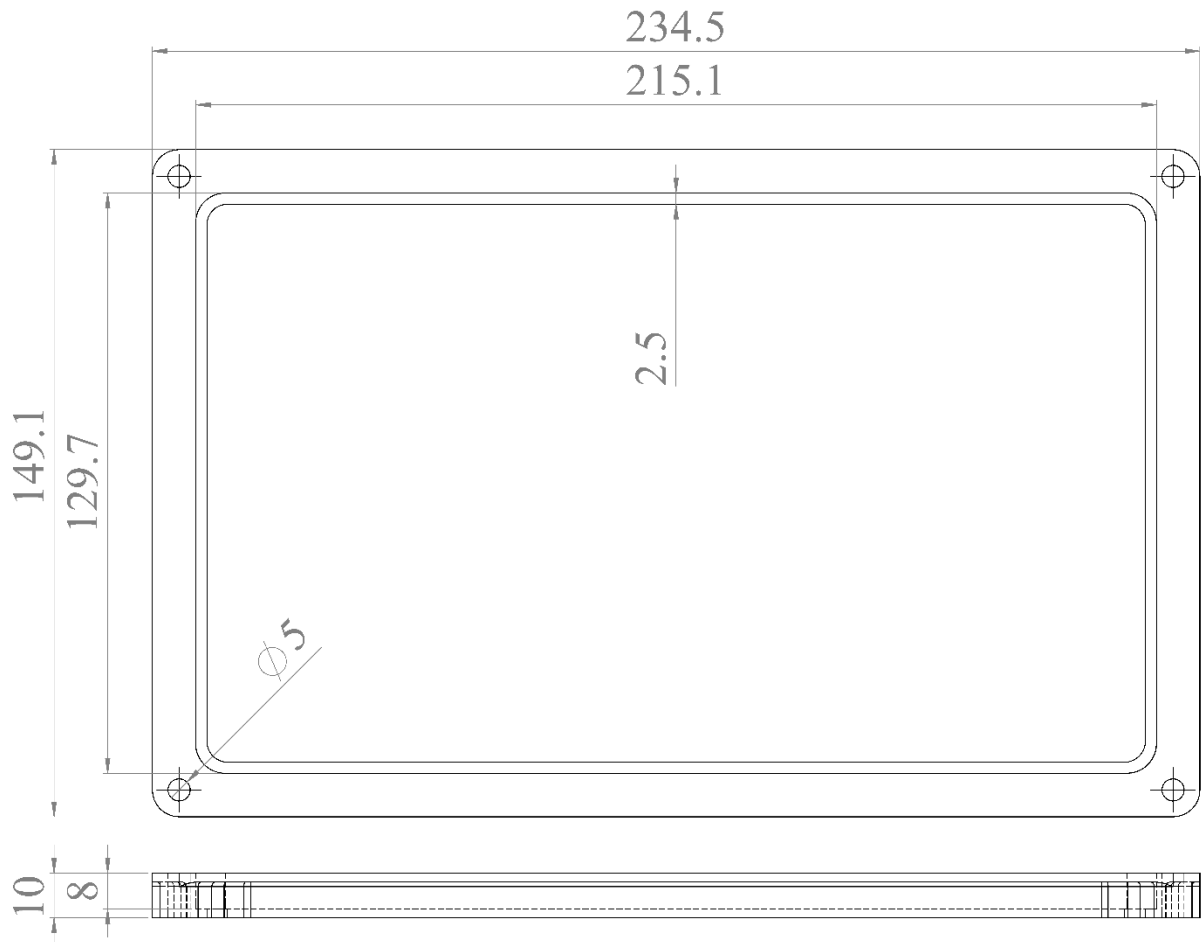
Dimensioned drawing of the front frame component, all dimensions are in mm
